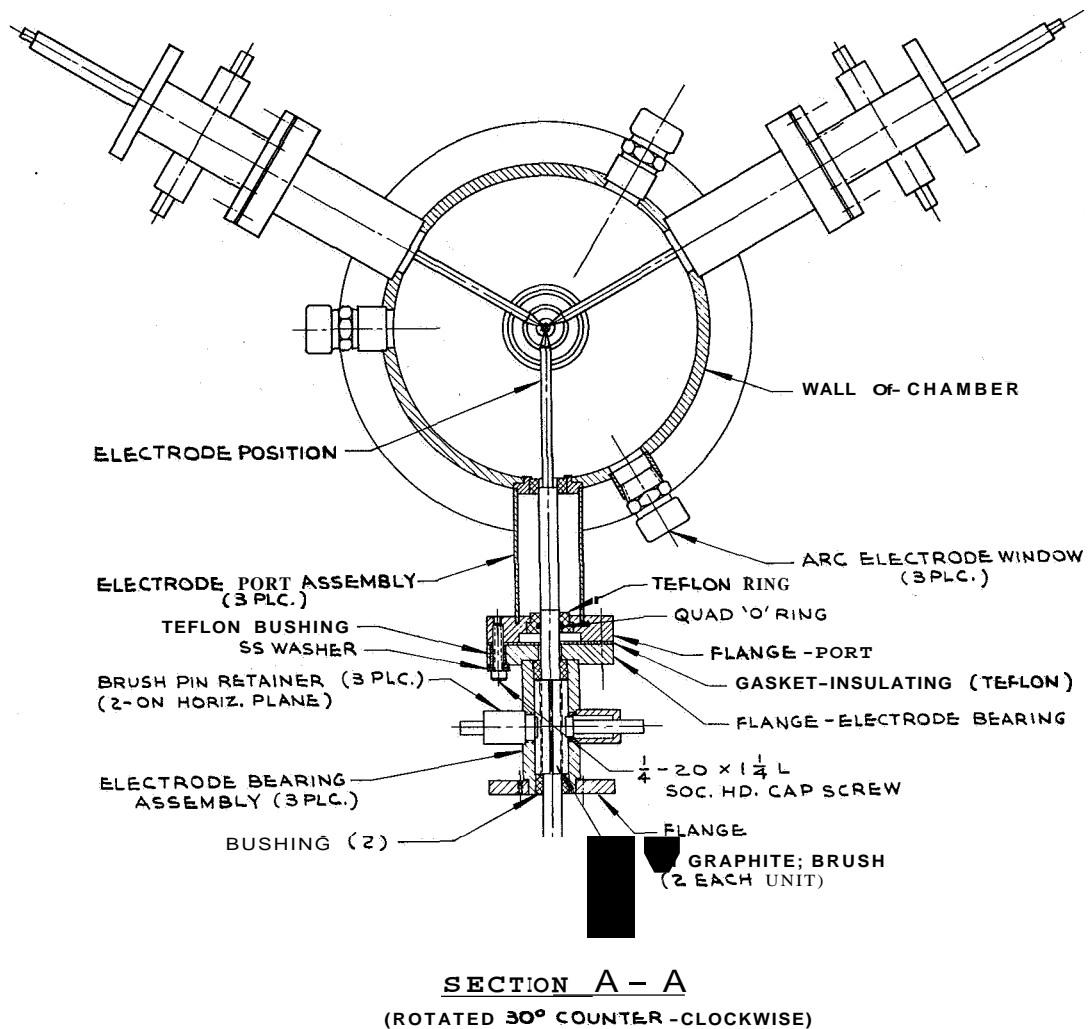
TOP SECTION VIEW OF ARC-VERNEUIL FURNACE MOD 2 ASSEMBLY SHOWING THREE HORIZONTAL ELECTRODES
